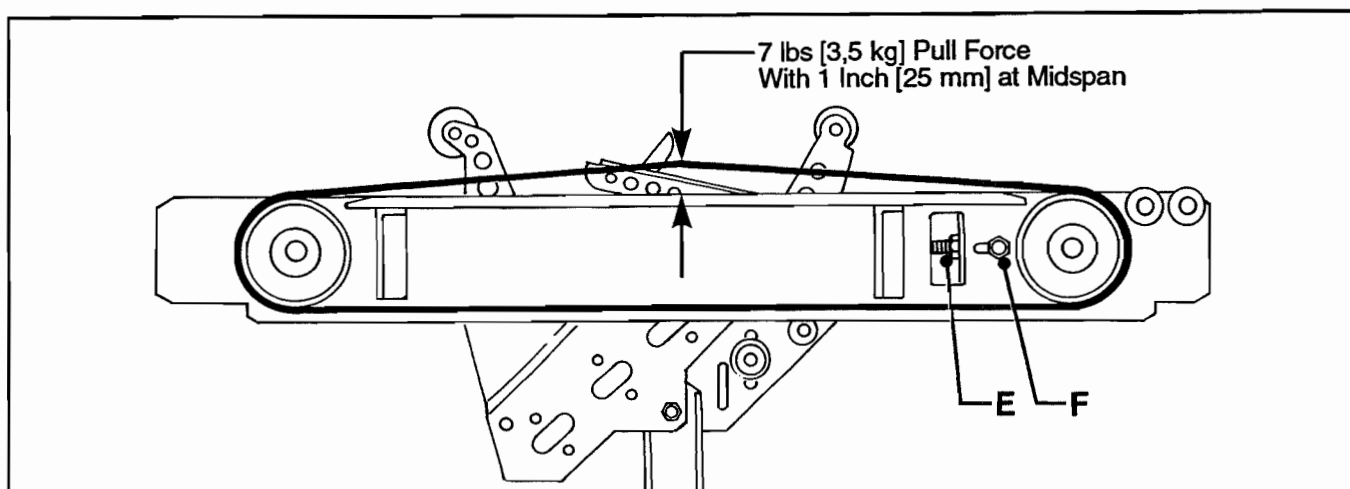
Belt Tension Adjustment, Lower Belt(s)
